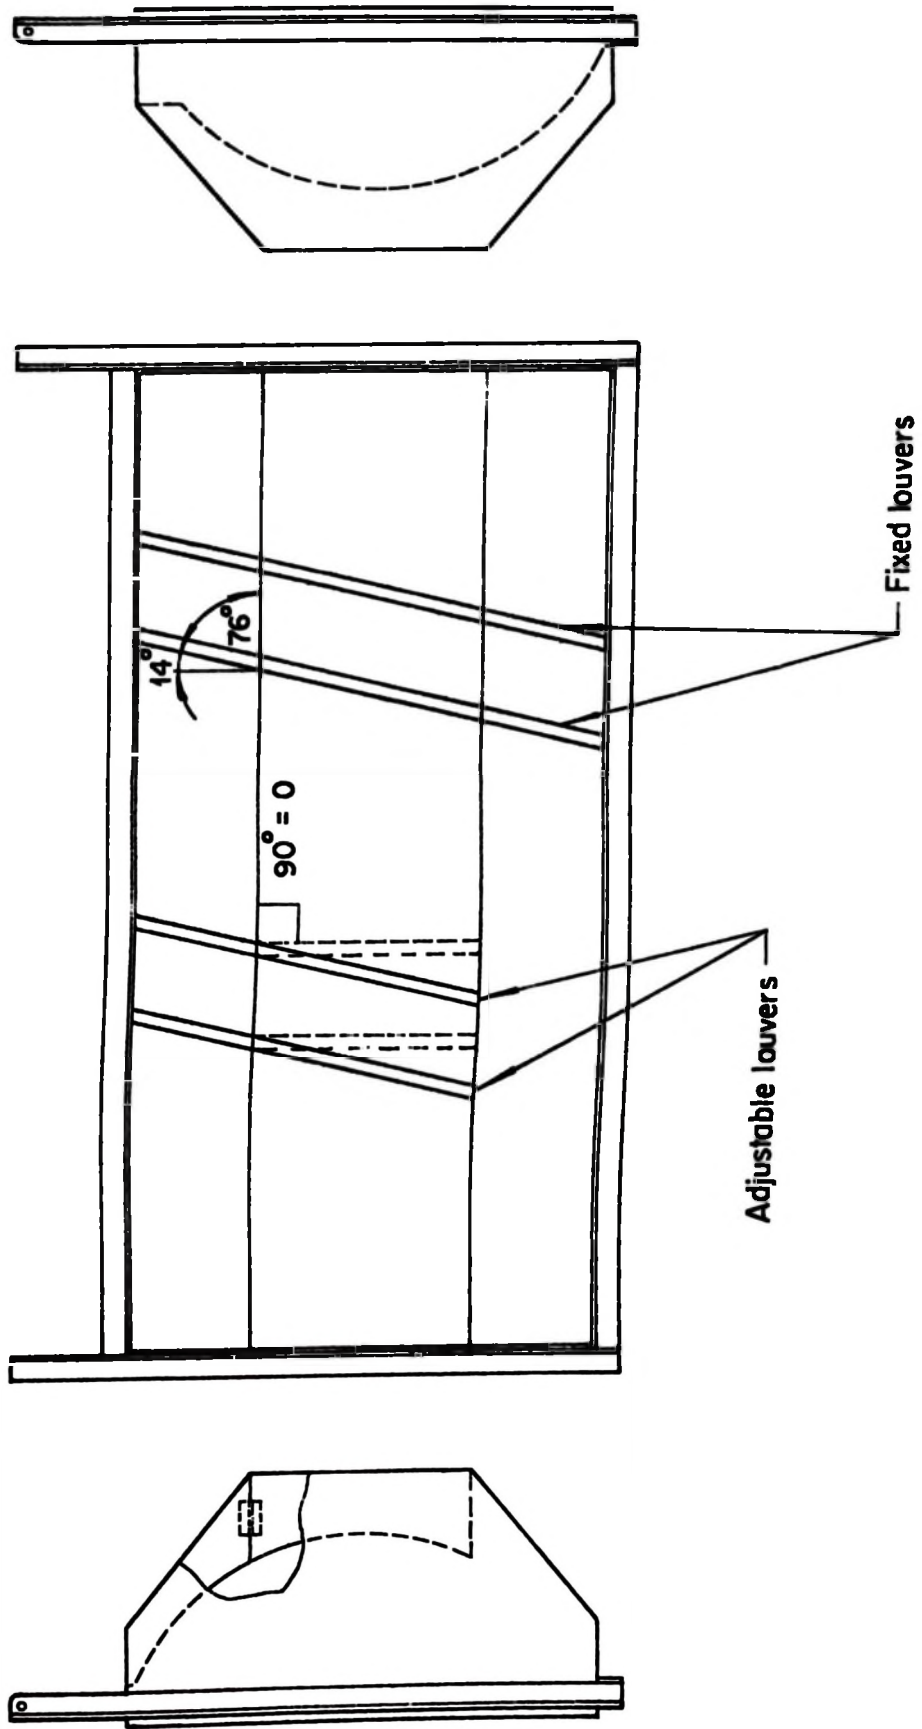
Fixed and adjustable louvers on the threshing cylinder cover .
